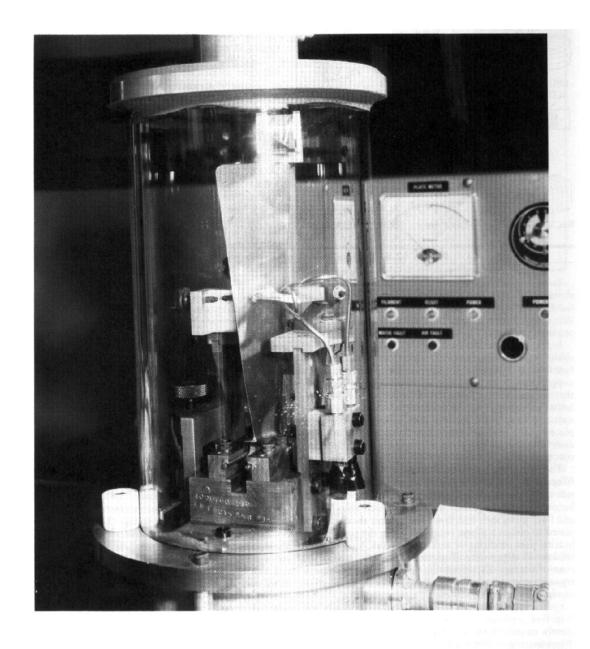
Example of Vacuum Induction Brazing. A Tungsten Carbide Wear Pad is Being Brazing to A Titanium Compressor Blade
